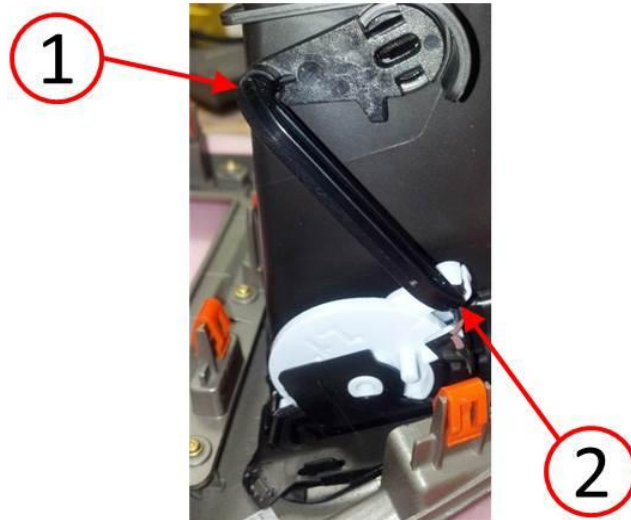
HVAC Outlet Inner Side Edge Attachment
